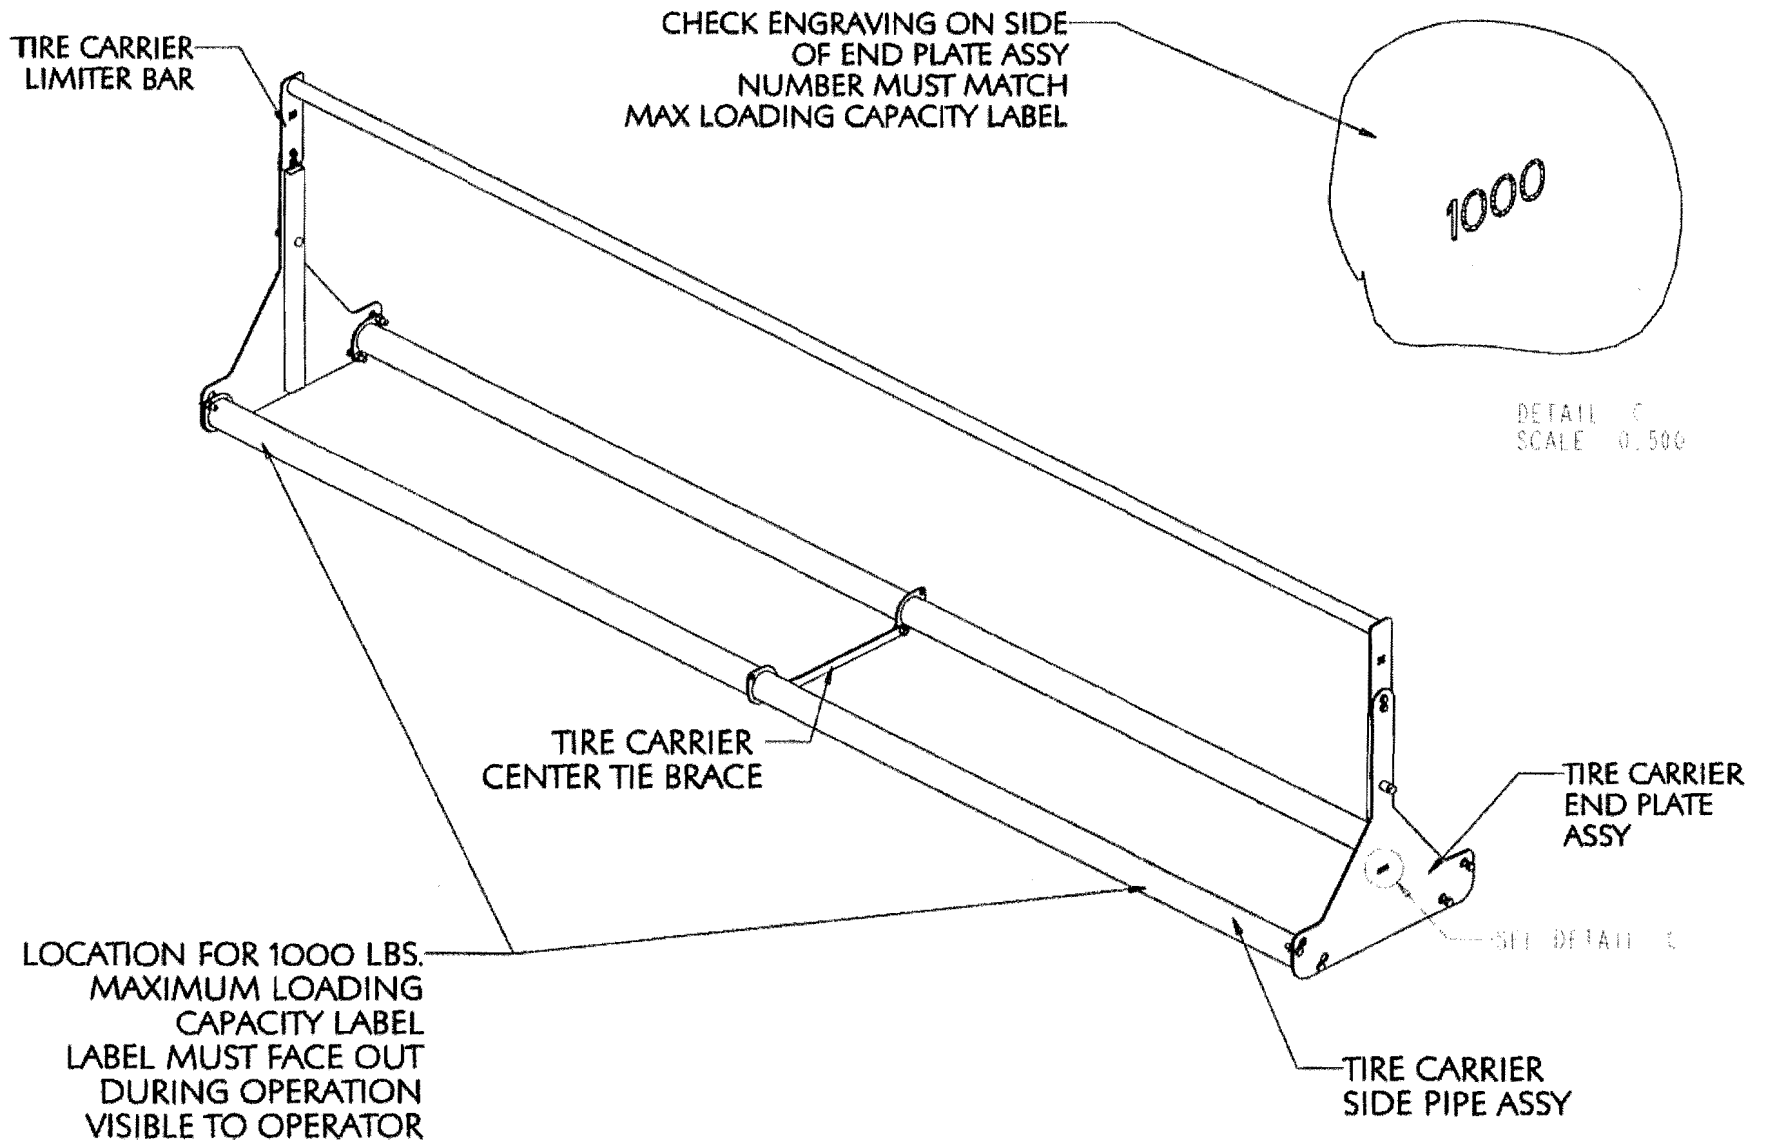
(B)—TIRE CARRIER ASSEMBLY
